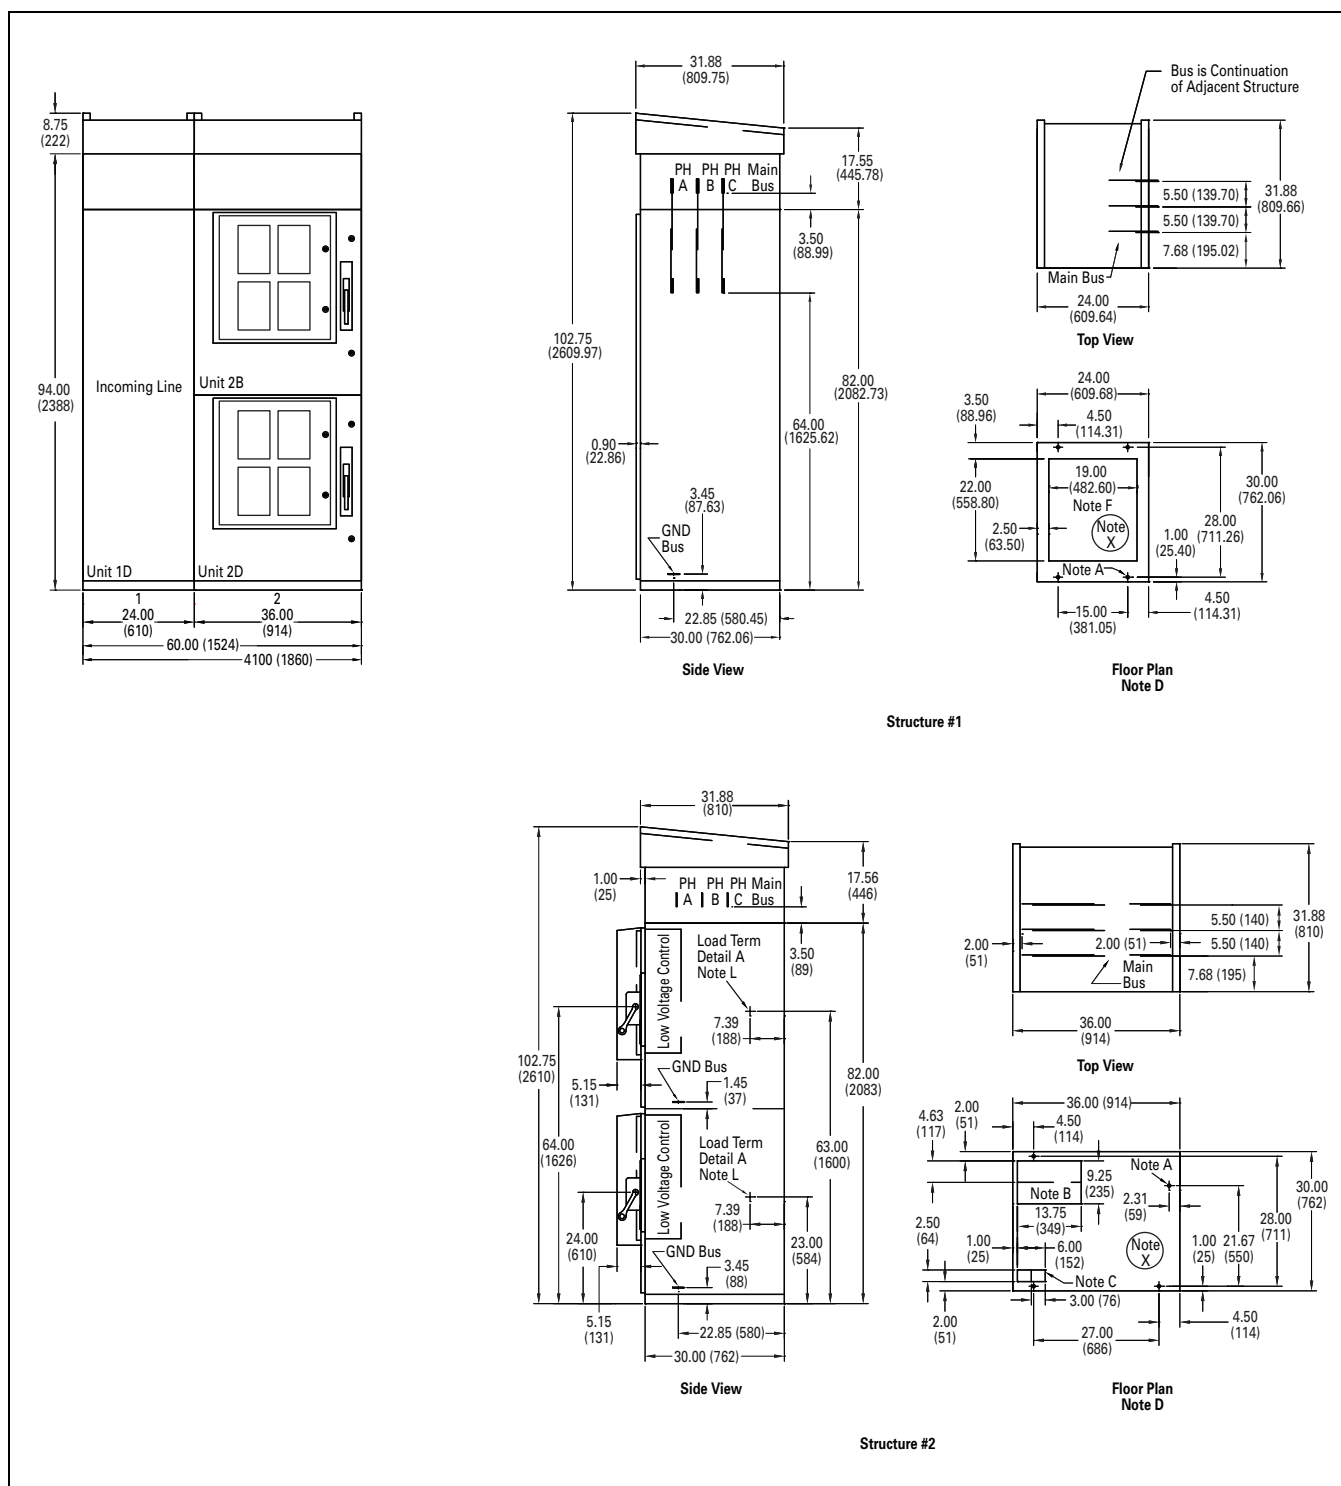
Arrangement Detail (Full Voltage 400 A) NEMA 3R
